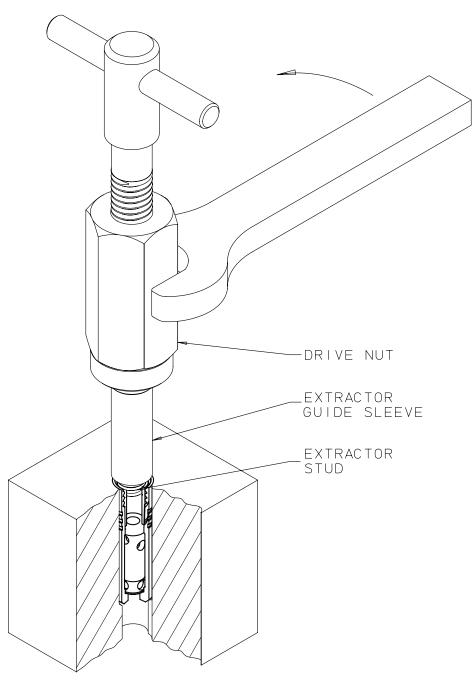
<u>T-Handle Type Pin Jacking Tool</u>
